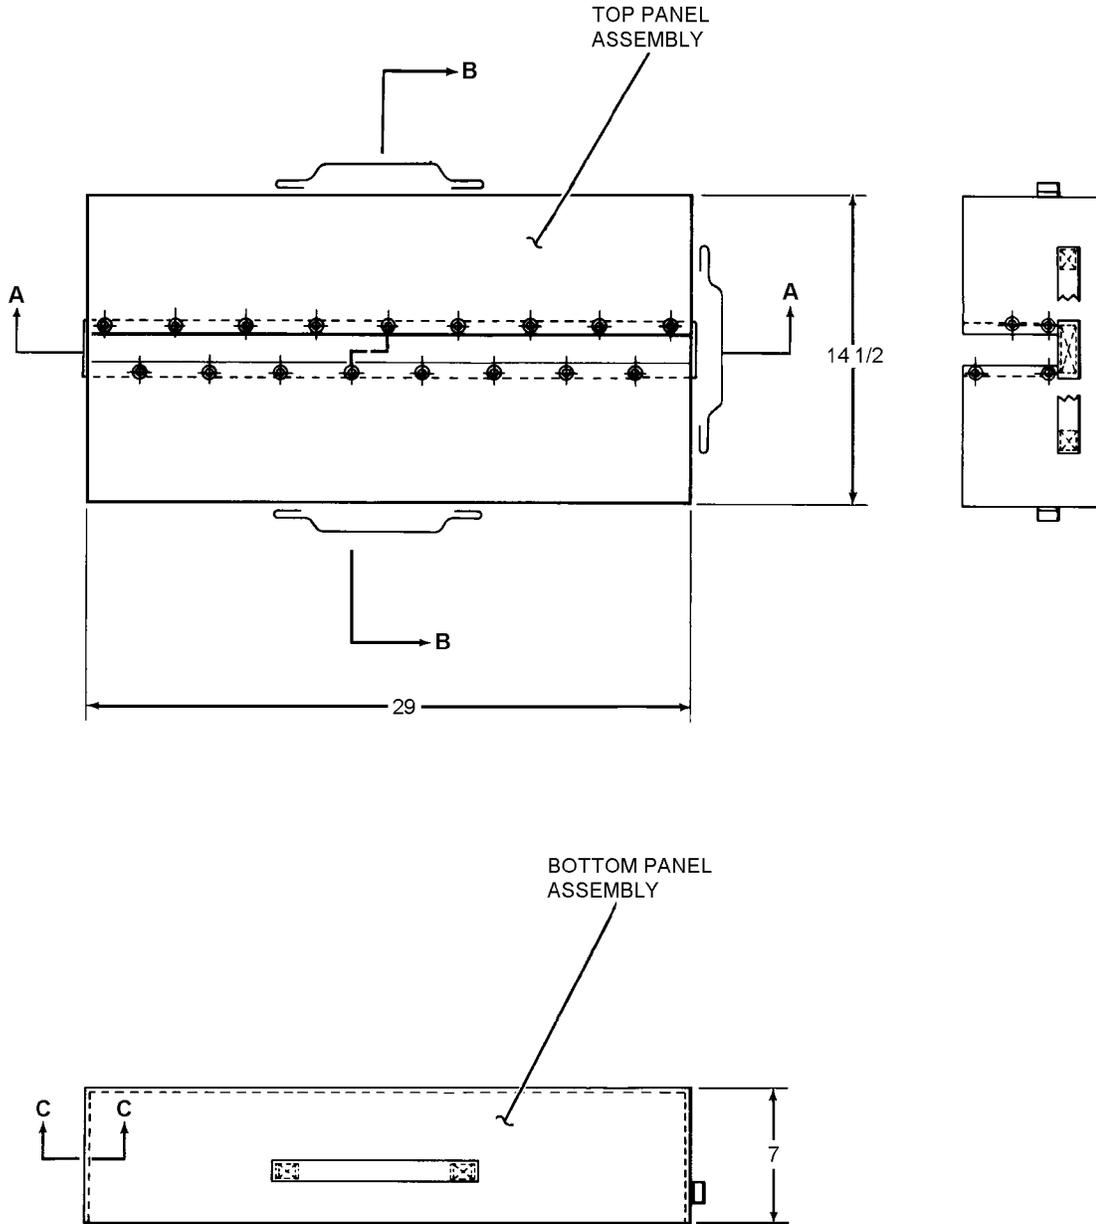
LRU-13/A Liferaft Container, P-3 SAR Kit (Sheet 1 of 2)
